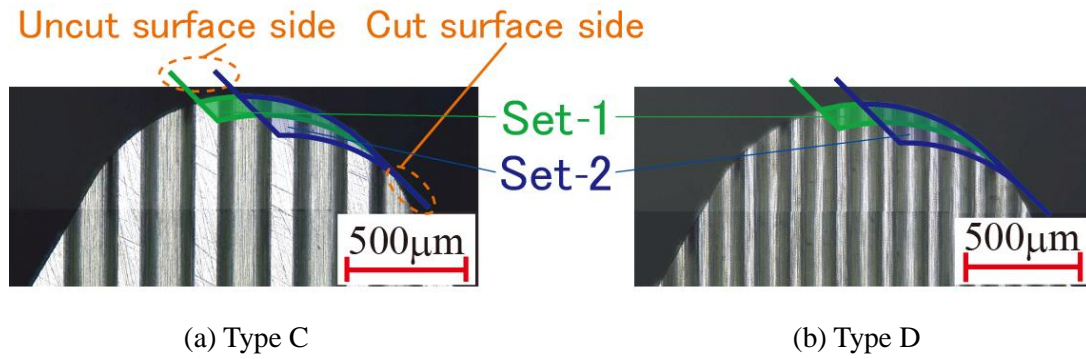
Engagement regions of workpiece on grooved tool edges at guide angle of  $45^\circ$
